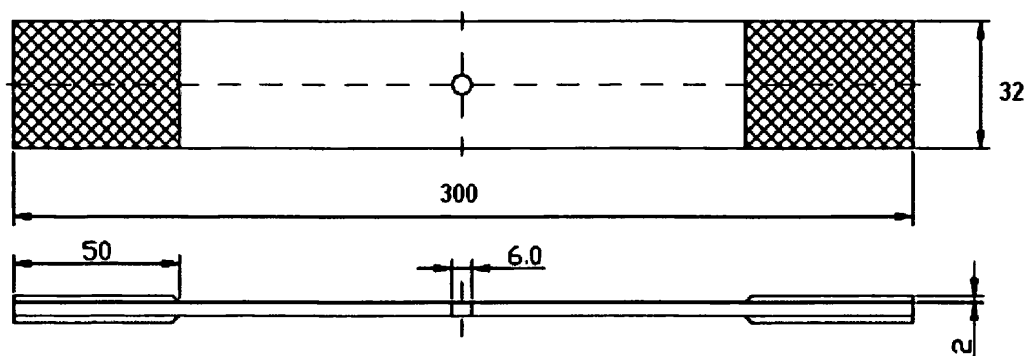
Dimension of coupon for open hole tensile test (mm)⁽⁹⁾.
